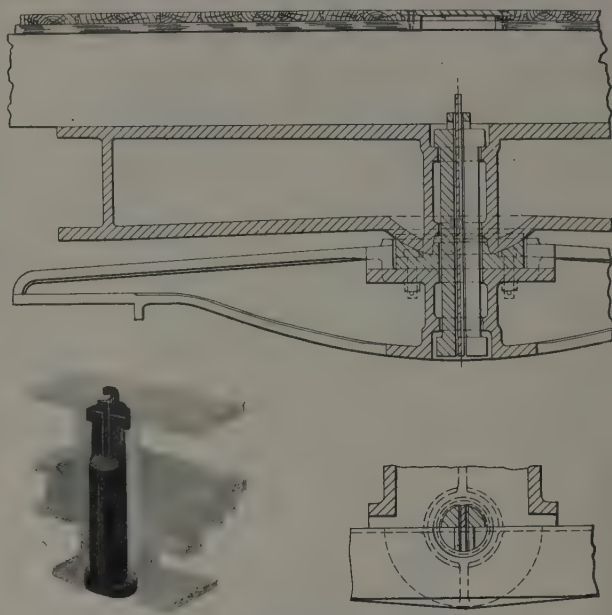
Coleman Bolster-Locking Center Pin. W. H. Miner.
